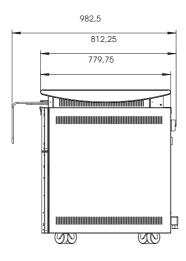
Dimensions of DELTA V Advantage - Side View
